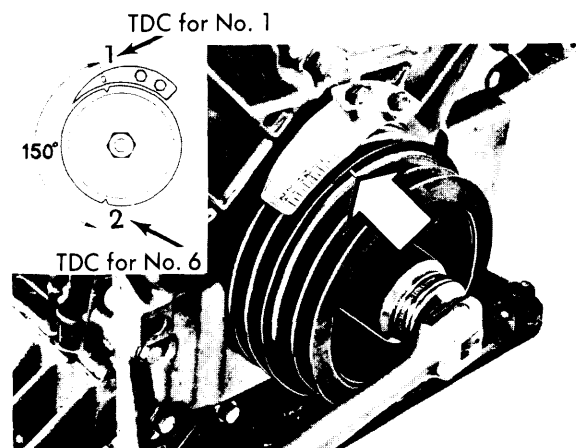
Adjusting Crankshaft to Firing Position for No. 1 Cylinder
